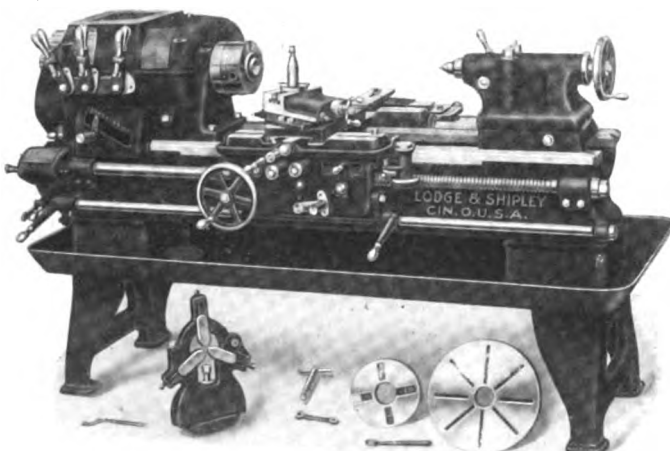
16" Selective Head Tool Room Lathe Manufactured in Sizes 14" to 20" with Either 3-Step Cone or Selective Headstocks
